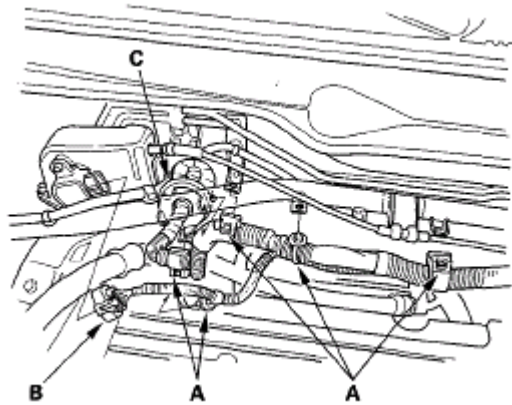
Identifying Harness Clamps, Accelerator Pedal Position (APP) Sensor Connector And Grommet
